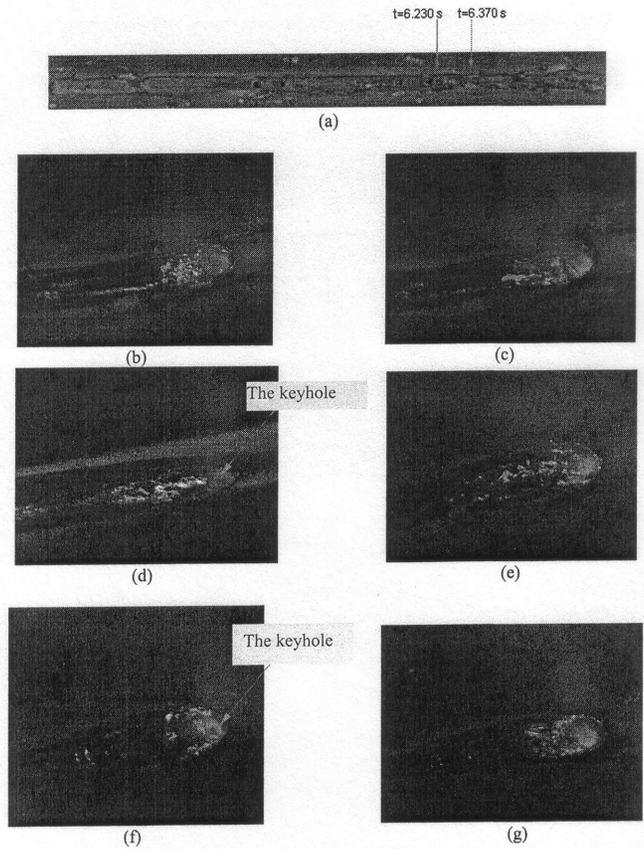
The shape of the molten pool for an instable welding process. (a) The top view of the laser/GTAW weld, (b) $t=6.2$ s (collapsed), (c) $t=6.230$ s (collapsed), (d) $t=6.270$ s (open), (e) $t=6.30$ s (collapsed), (f) $t=6.330$ s (open), and (g) $t=6.370$ s (collapsed) (preheated at the arc current of 160 A, welded at the laser power of 3000 W and the welding speed of 1.8 m/min).
